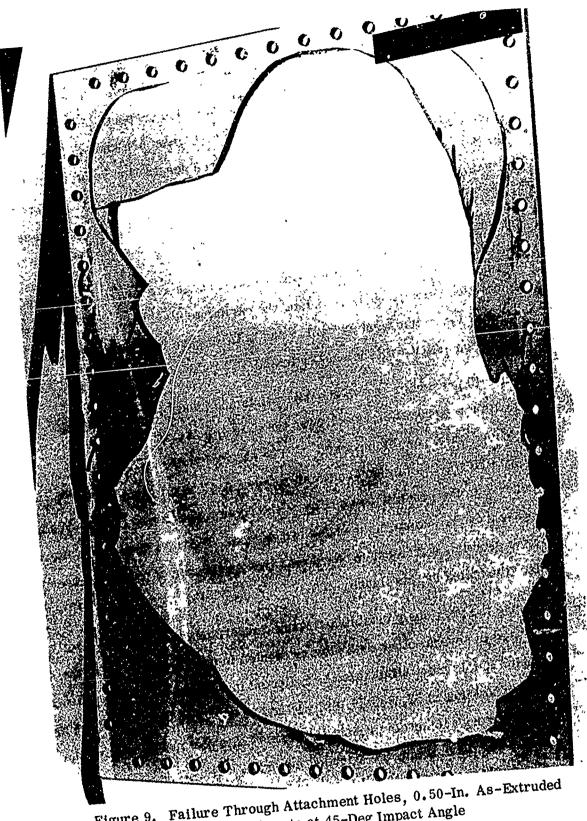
Failure Through Attachment Holes, 0.50-In. As-Extruded
